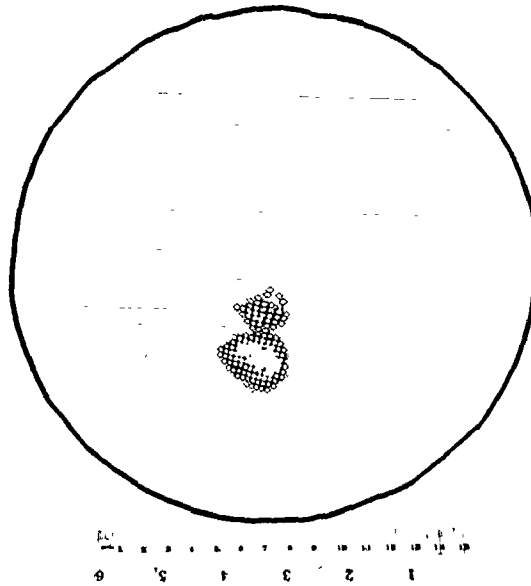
A hole expansion test piece illustrating the mode of failure. Steel F.
